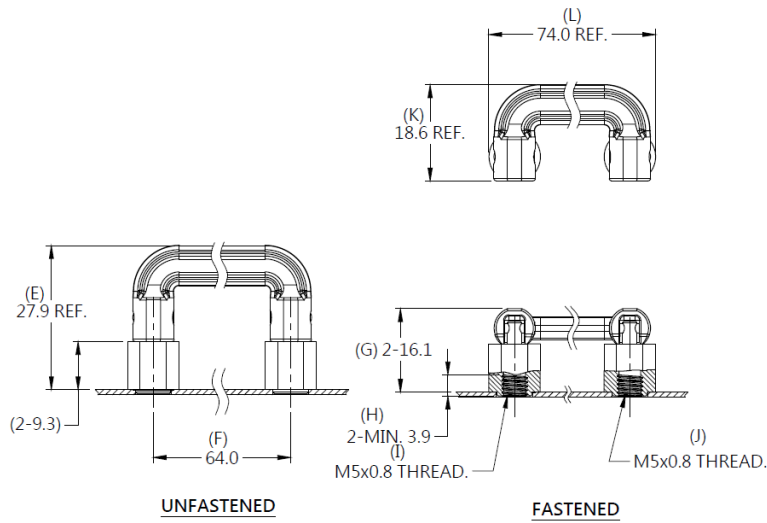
Dimensioned Smart Folding Handle from Reference Design
